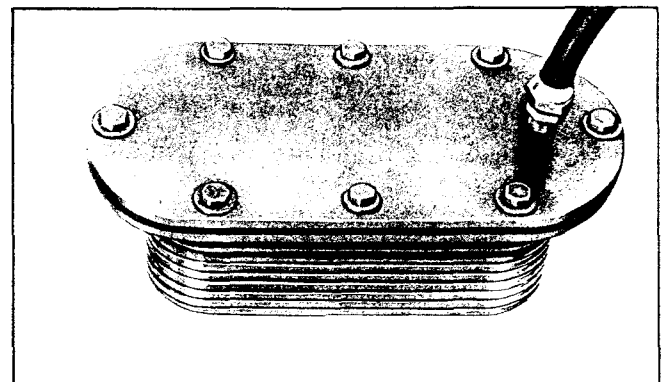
Preparing Oil Cooler Core for Pressure Test
